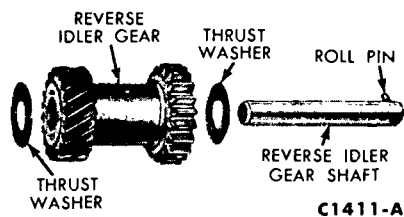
Reverse Idler Shaft and Gear — Disassembled
